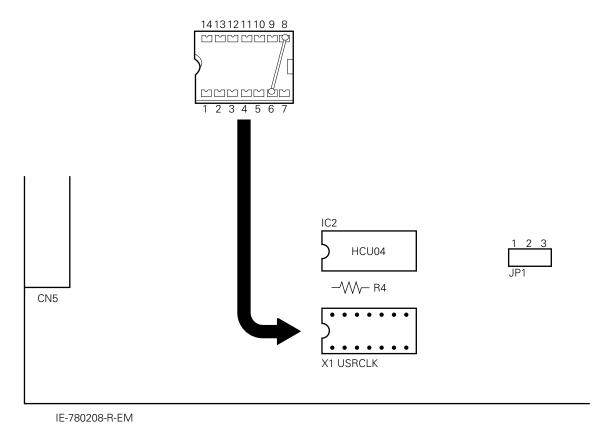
Wiring of Component Block (to use an external clock as the main system clock)
